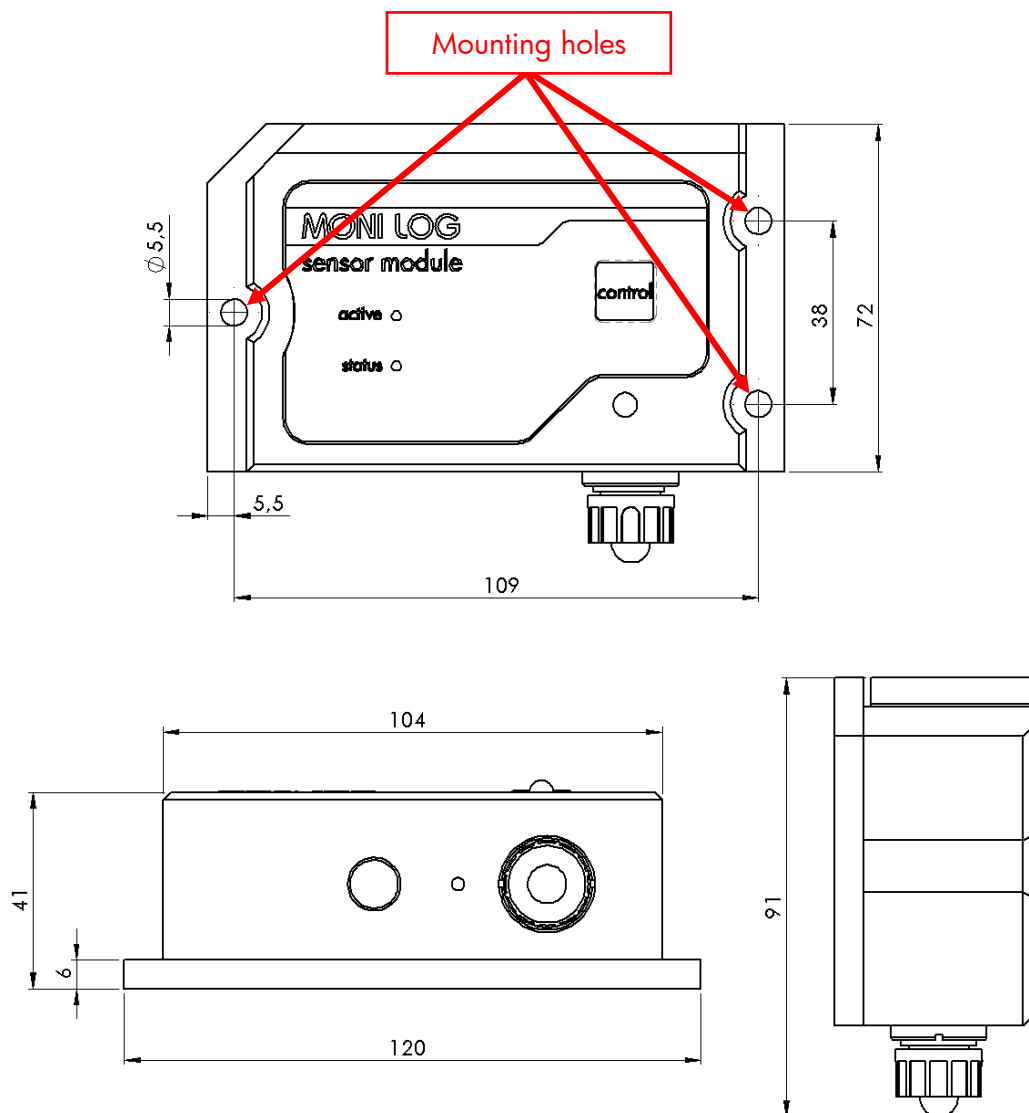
Dimensions and mounting information of the sensor module (dimensions in mm)
